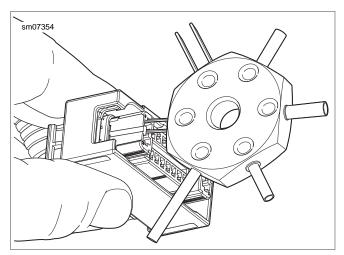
Removing Large Socket Terminals: Tyco MCP Connector
